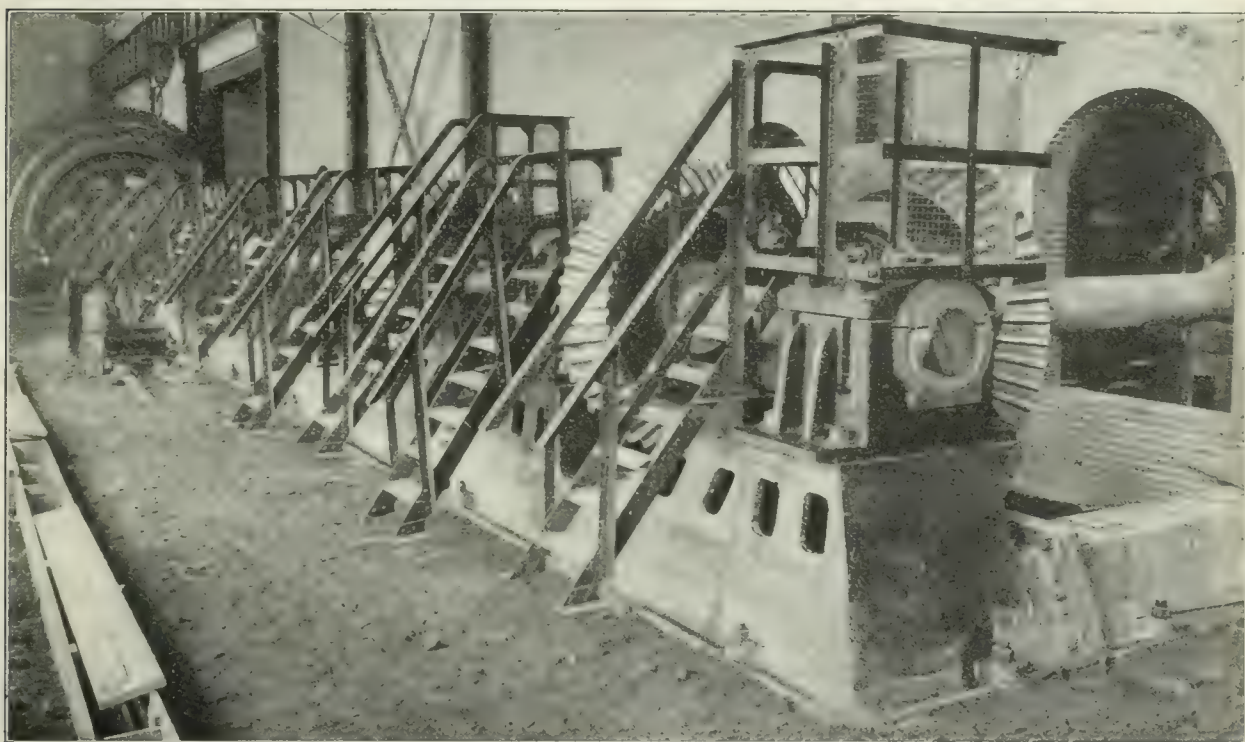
The Main Drive, No. 2 Structural Mill; Westinghouse, 3,000 h.p. Motor and Bevel Gear Drive.
